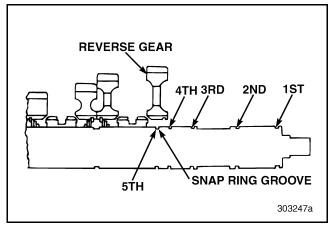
Installing Reverse Gear Mainshaft Snap Ring (T313L/T318L Shown)
